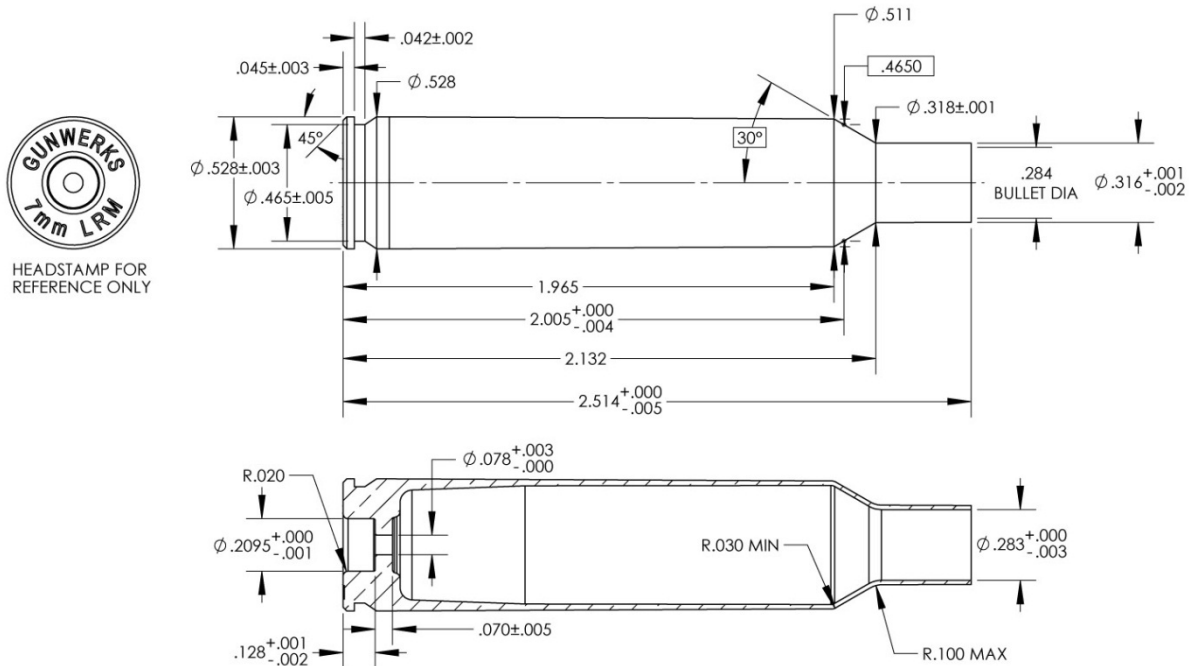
7mm LRM case dimensions and tolerances.
